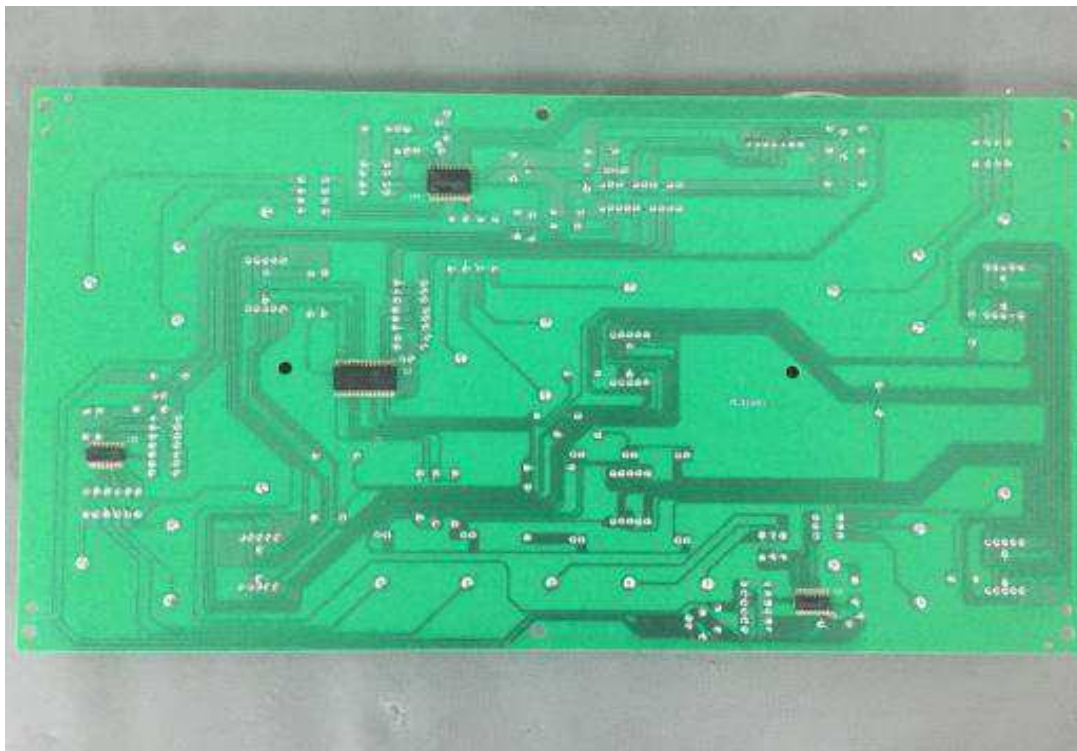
Optional internal view of C74E Power PCB 01 (top)
